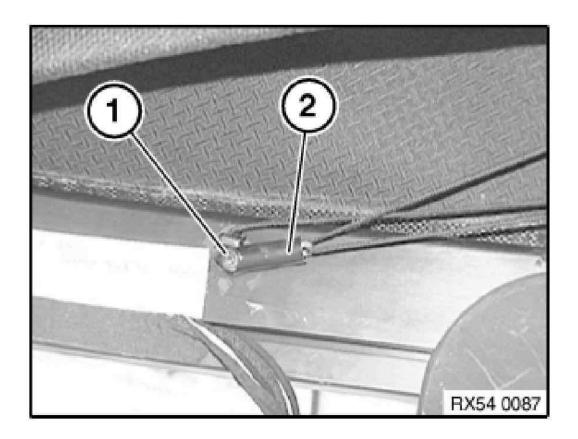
Drilling Out Rivets For Tension Strap And Roofliner Courtesy of BMW OF NORTH AMERICA, INC.
